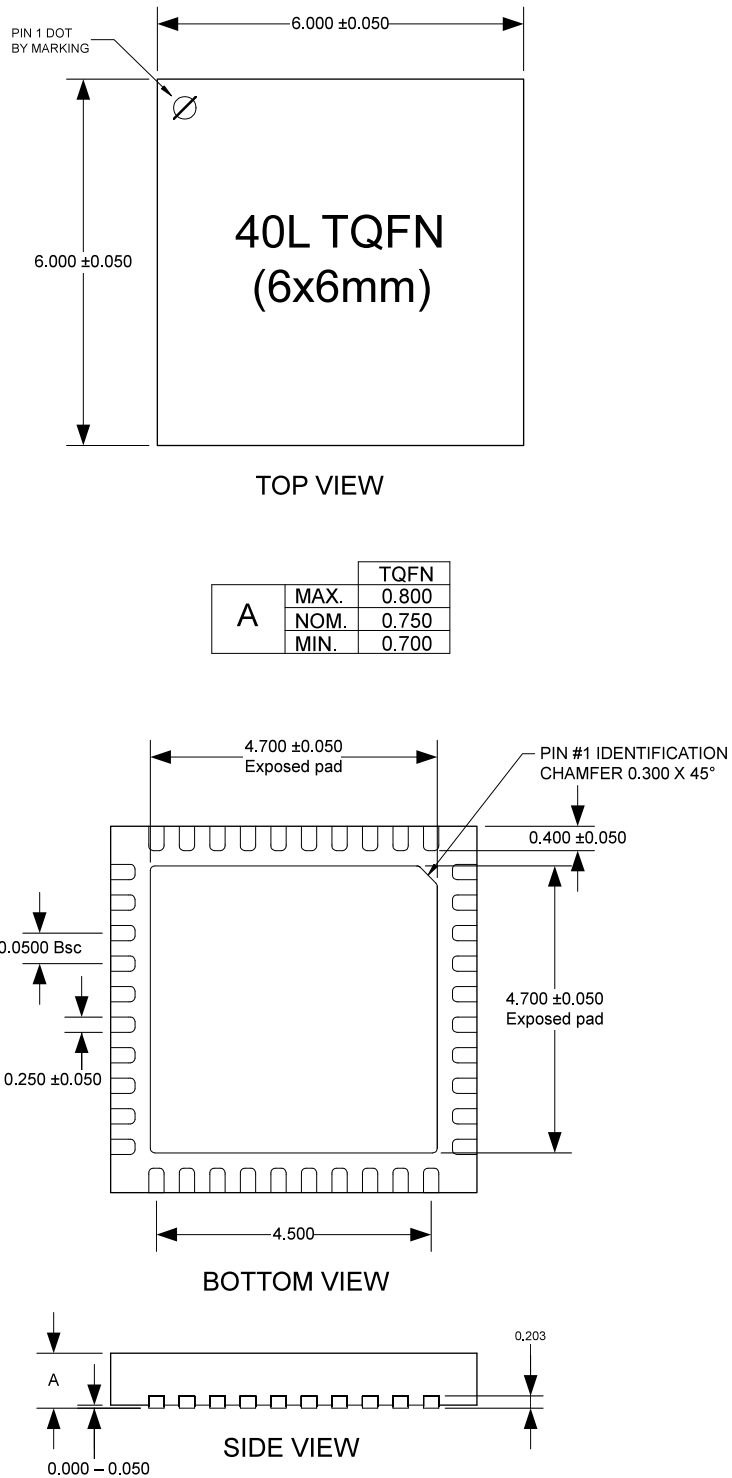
Package Dimensions: 40 Pin 6mm x 6mm x 0.75mm TQFN (0.5mm pin pitch) with exposed pad
